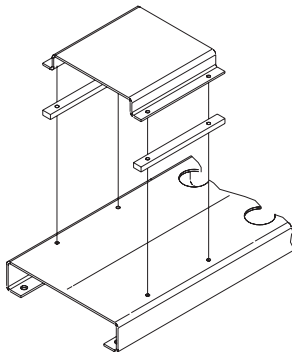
Aligning Pedestal and Pedestal Mounting Bars to Baseplate
